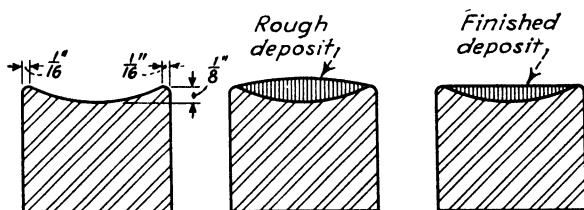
Groove or recess the base metal before applying the hard-facing metal.
